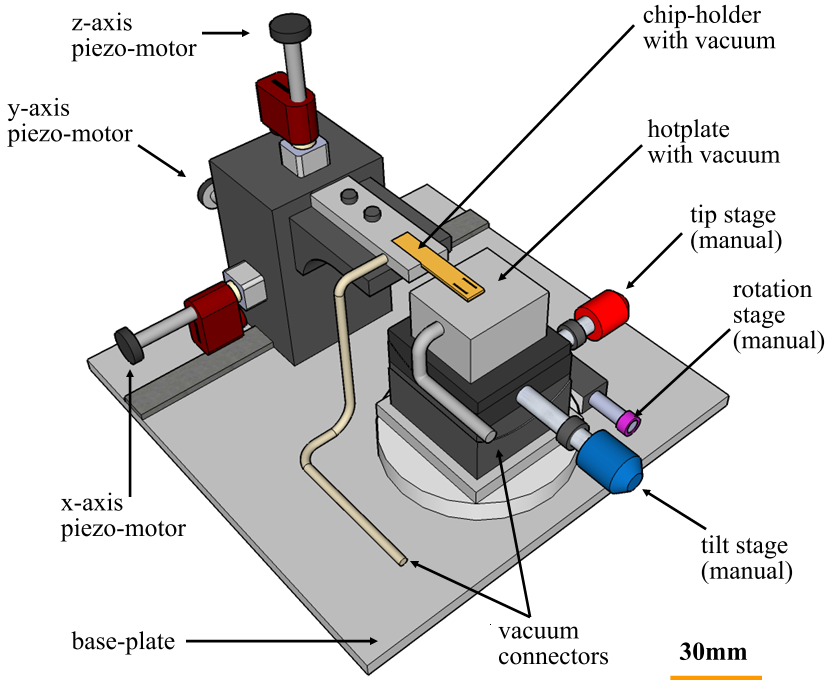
Schematic drawing of the custom assembly setup. The setup consists of a base plate, serving as an interface to the motorized stage of the Veeco Wyko NT1100, onto which the two main components, the electrode chip holder assembly and the mirror chip holder assembly, are mounted. The electrode chip holder assembly consists of a hot-plate, with an integrated vacuum feed for clamping the electrode chip, that is mounted onto a tip-tilt goniometer; the latter is mounted on a rotational stage. The mirror chip holder assembly consists of the silicon chip holder itself that is mounted to a detachable aluminum part; the latter being mounted on a motorized XYZ translational stage. The translational stage is mounted on sliding rail, allowing coarse displacement of the chip holder assembly for chip loading and unloading.
